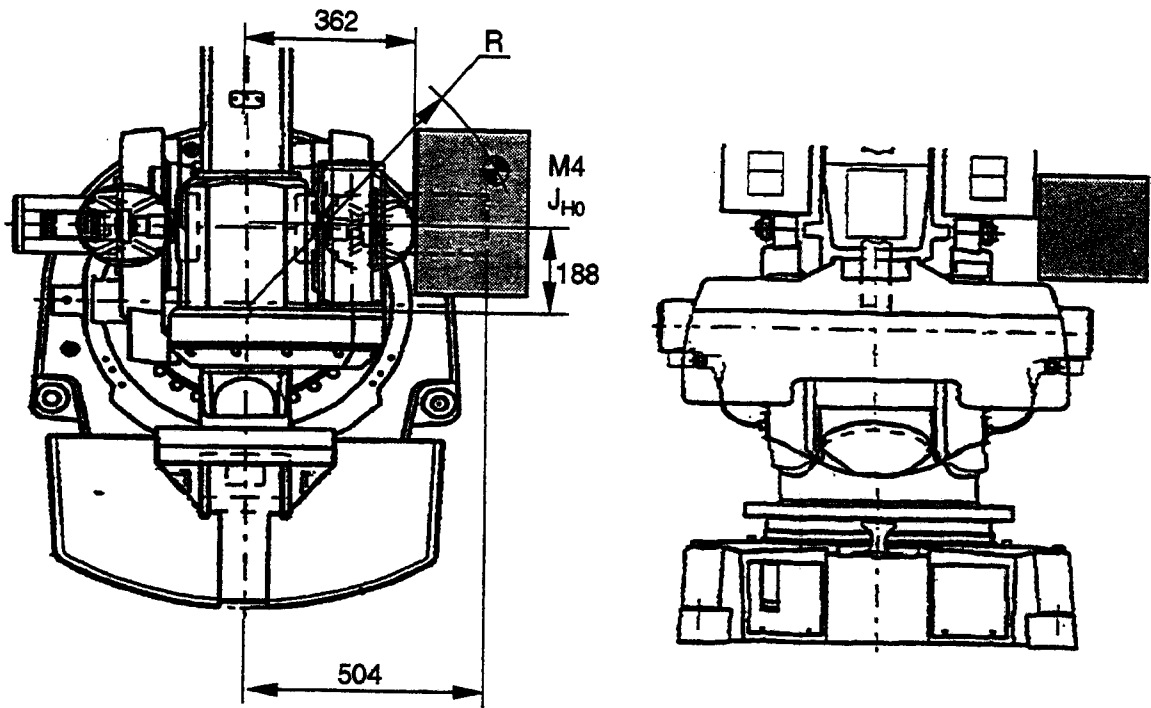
Extra load on frame of IRB 6400 /2.4-120, /2.4-150, /2.8-120, /3.0-75 and IRB 6400PE /2.25-75. (Measures in mm).
